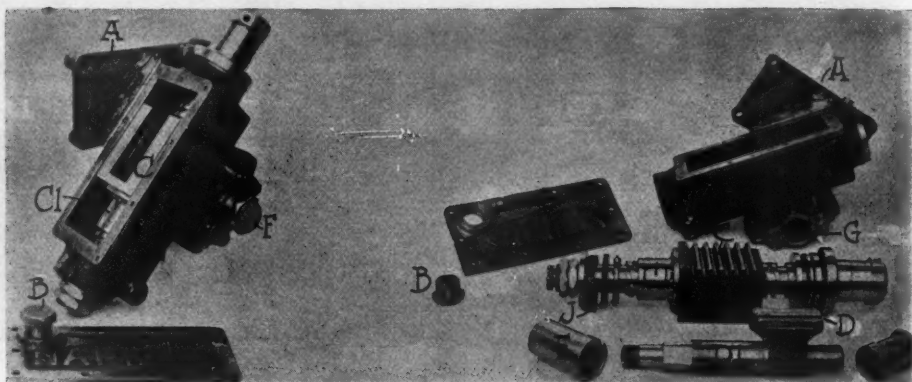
INTERESTING FEATURES OF NAPIER STEERING GEAR
